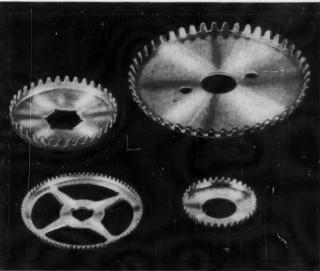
Crown gears afford an inexpensive method of changing plane of rotation and simplify many design problems. Courtesy Winzeler Mfg. and Tool Co.
